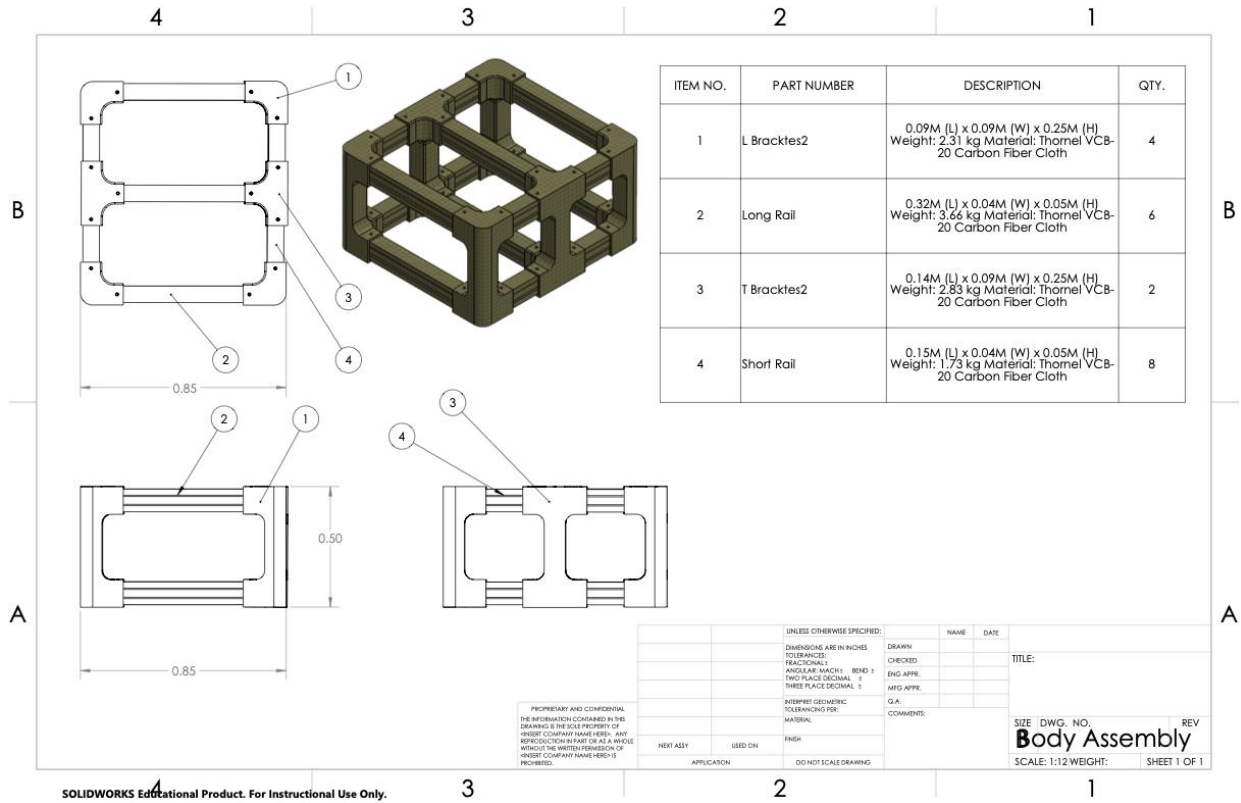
CAD drawing of ARES-42 rover body assembly connecting the bones of the rover body. 0.62 m (L) x 0.74 m (W) x 0.56 m (H) Weight: 16.30 kg Material: Thornel VCB-20 Carbon Cloth
